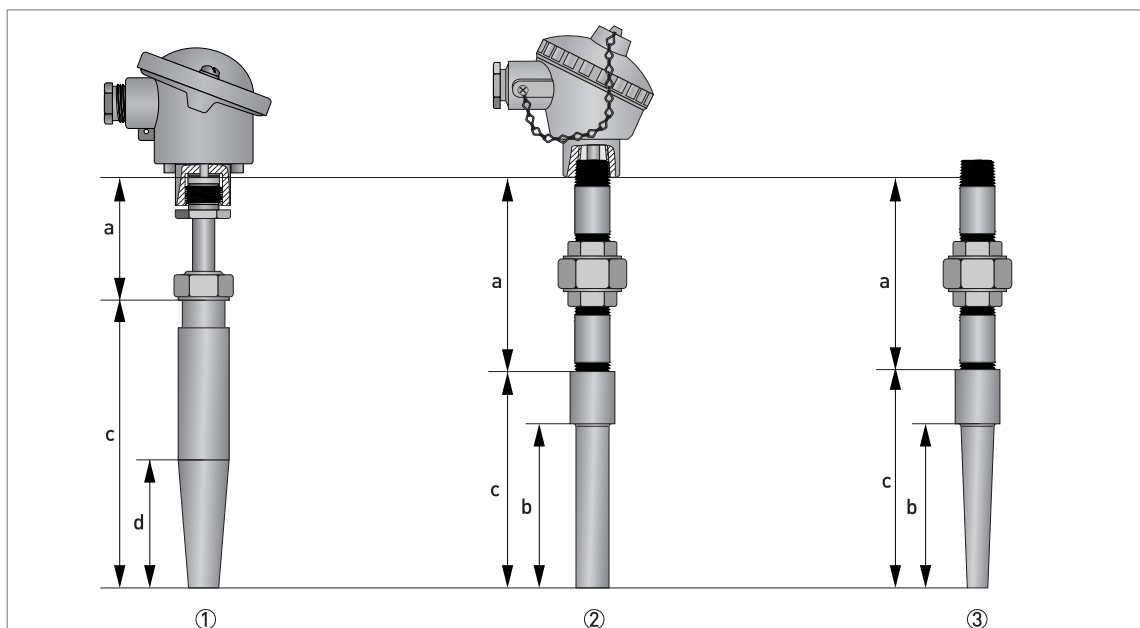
Weld-in thermometer according to DIN 43772 and ASME
